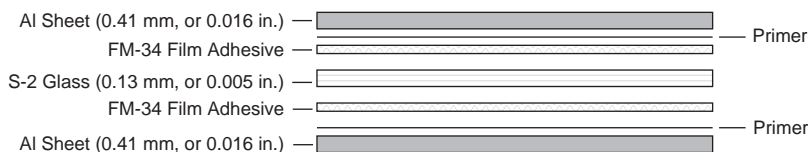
Typical glass laminate aluminum-reinforced ply construction
